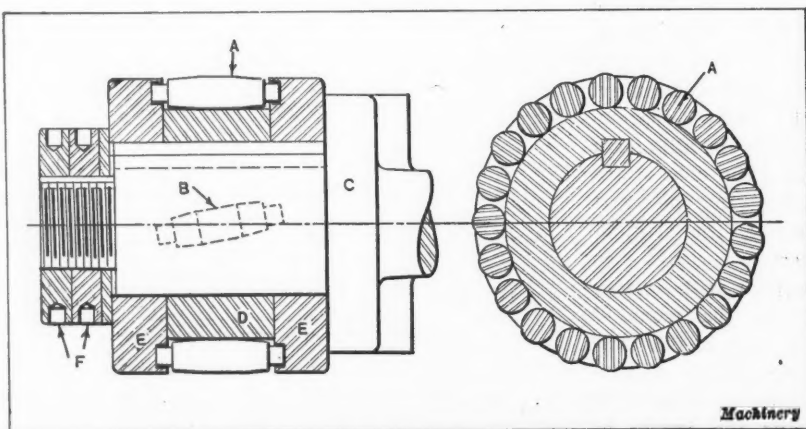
Sectional Views illustrating the Construction of the Burnishing Tool
